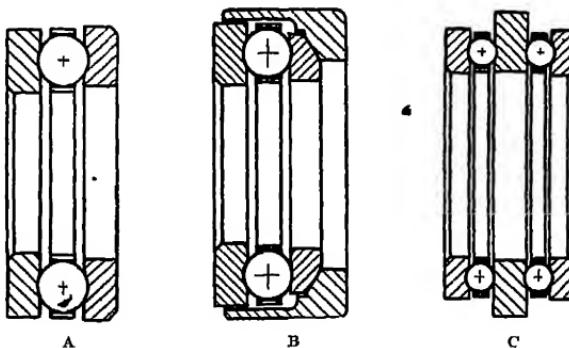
EXAMPLES OF THRUST BALL BEARINGS
